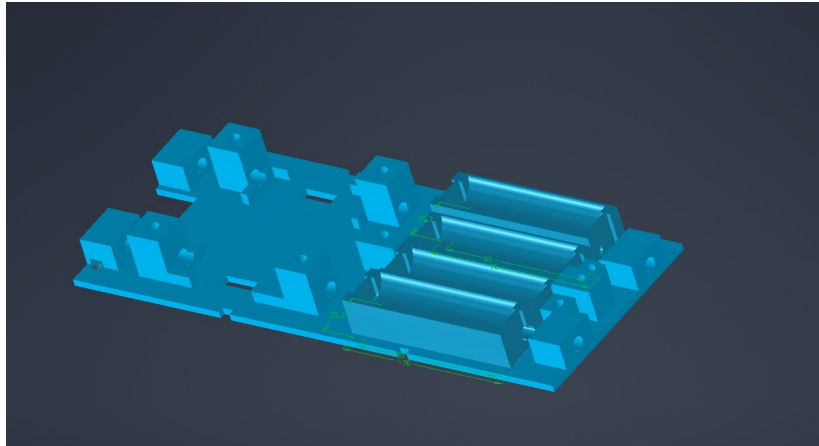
Flight-computer holder sled: 3D CAD model showing battery seating, rod clearances, and upper mounting platform. Authors' own CAD.
